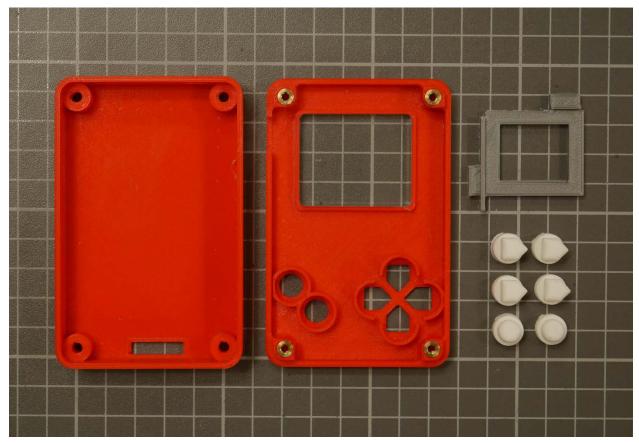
THE 3D PRINTED COMPONENTS OF THE MODULE.
